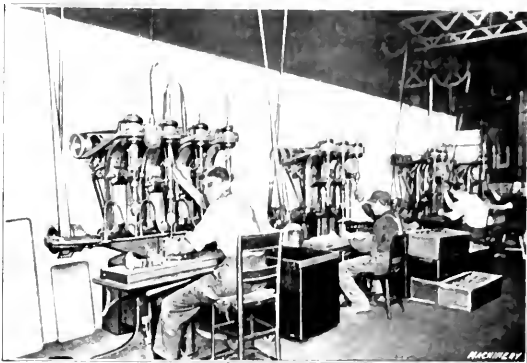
Drilling Parts of "Clipper" Lacing Tool Frame
